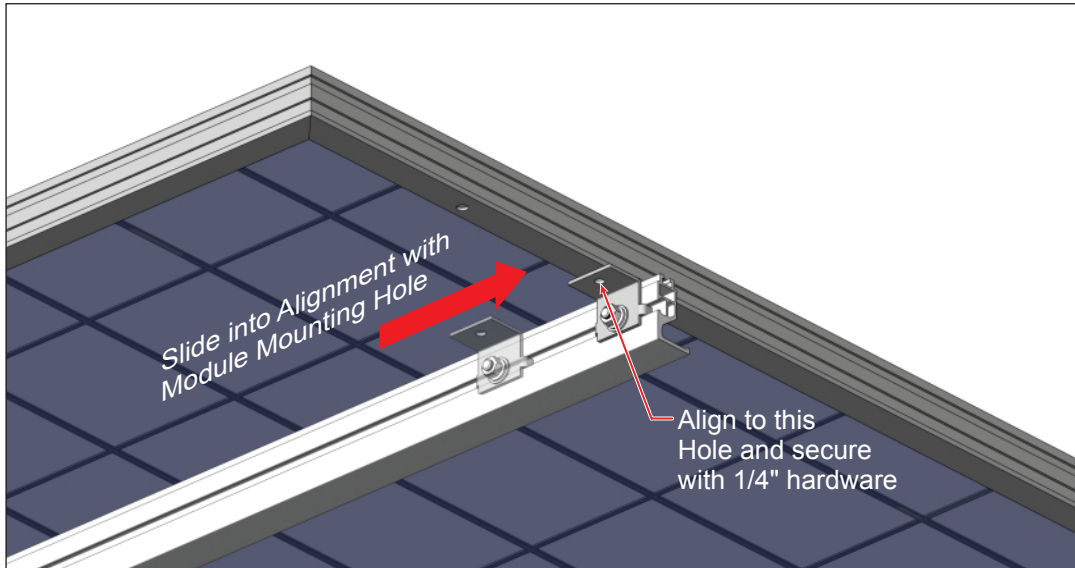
Aligning the Single Hole Slide Plate with PV Module Mounting Hole
